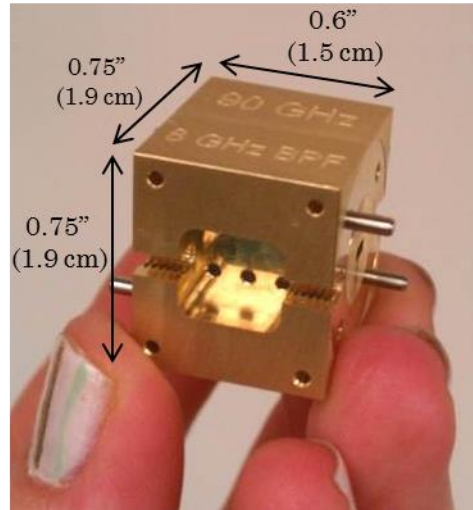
Machined 90 GHz Band Definition Filter Prototype
